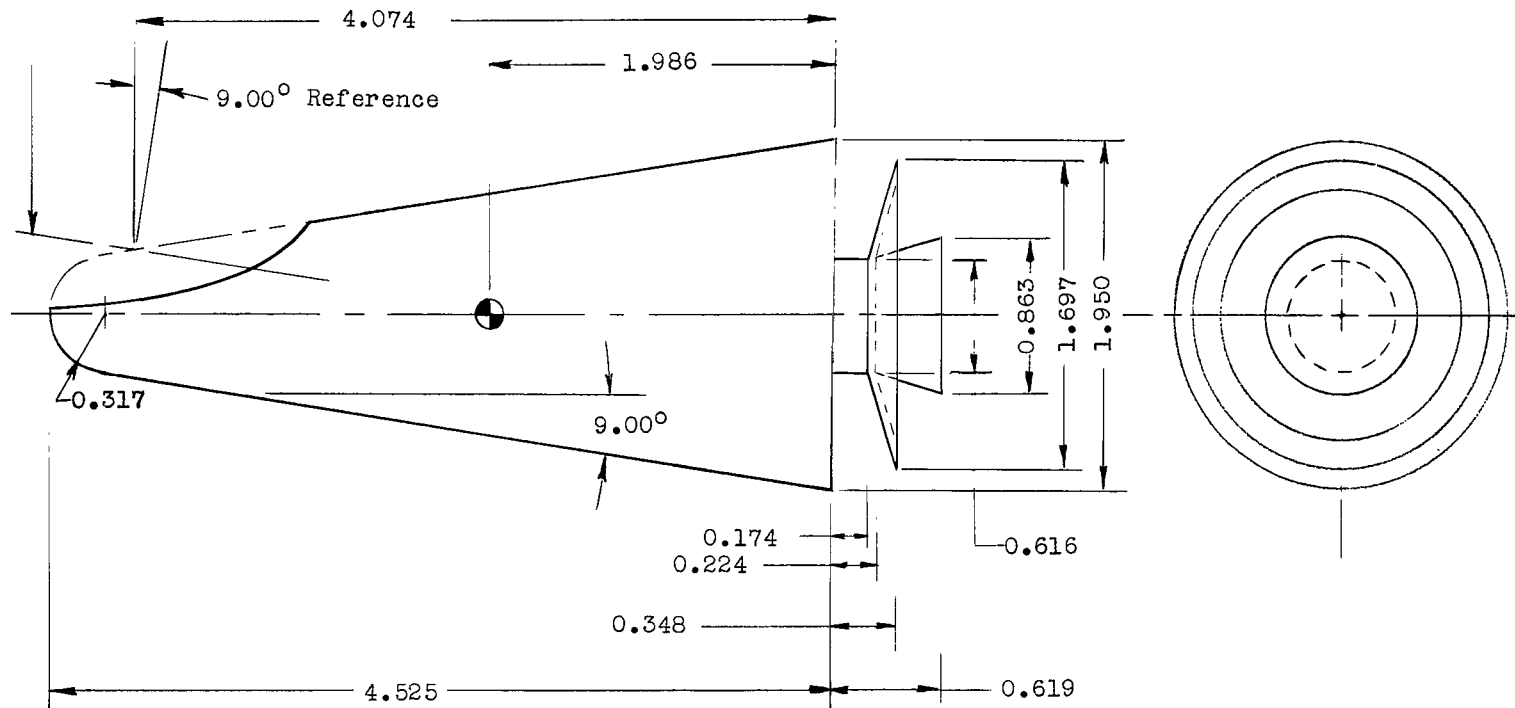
Sketch of model 2 showing the principal dimensions.
